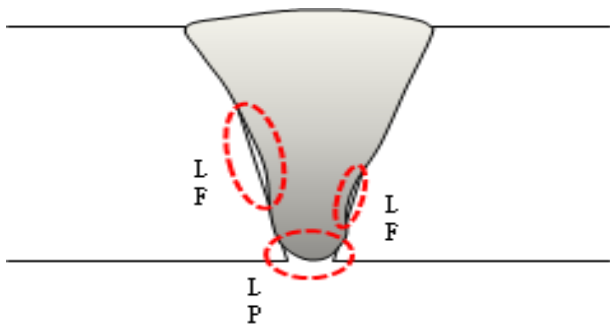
Schematic view of welding defect in narrow gap
